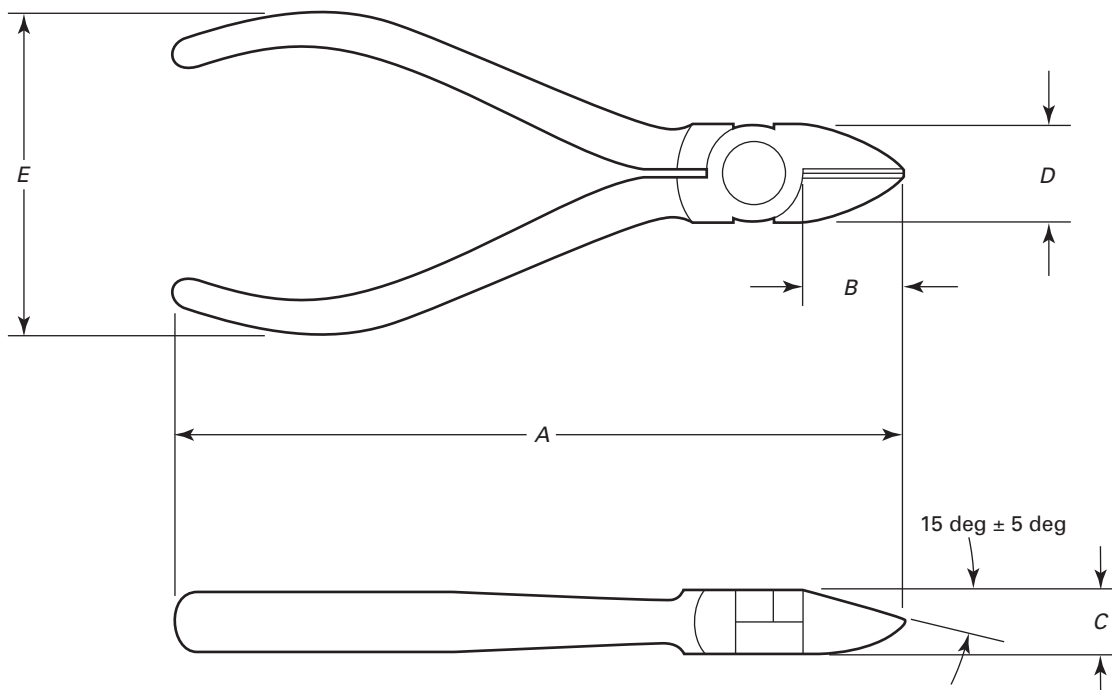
Type I, Class 1, Style B, Relieved Oval Head
